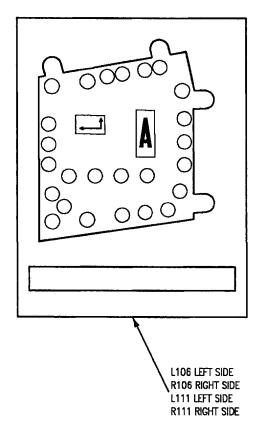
Installation of Plate Set for Drilling Door 82 Substructure (Sheet 3)
